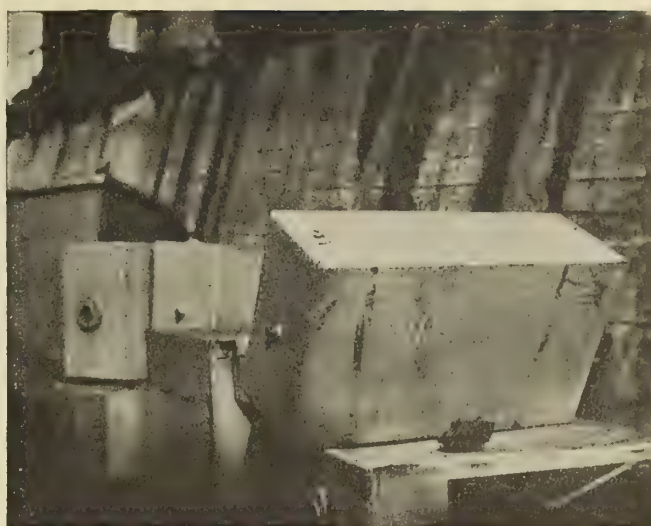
All Welded Oil Tanks, Toledo Shipbuilding Company, Toledo, Ohio
